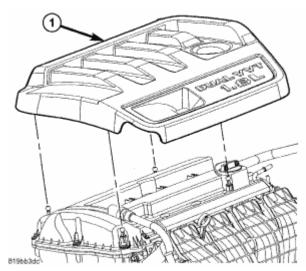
ENGINE COVER - 1.8L Courtesy of CHRYSLER LLC
